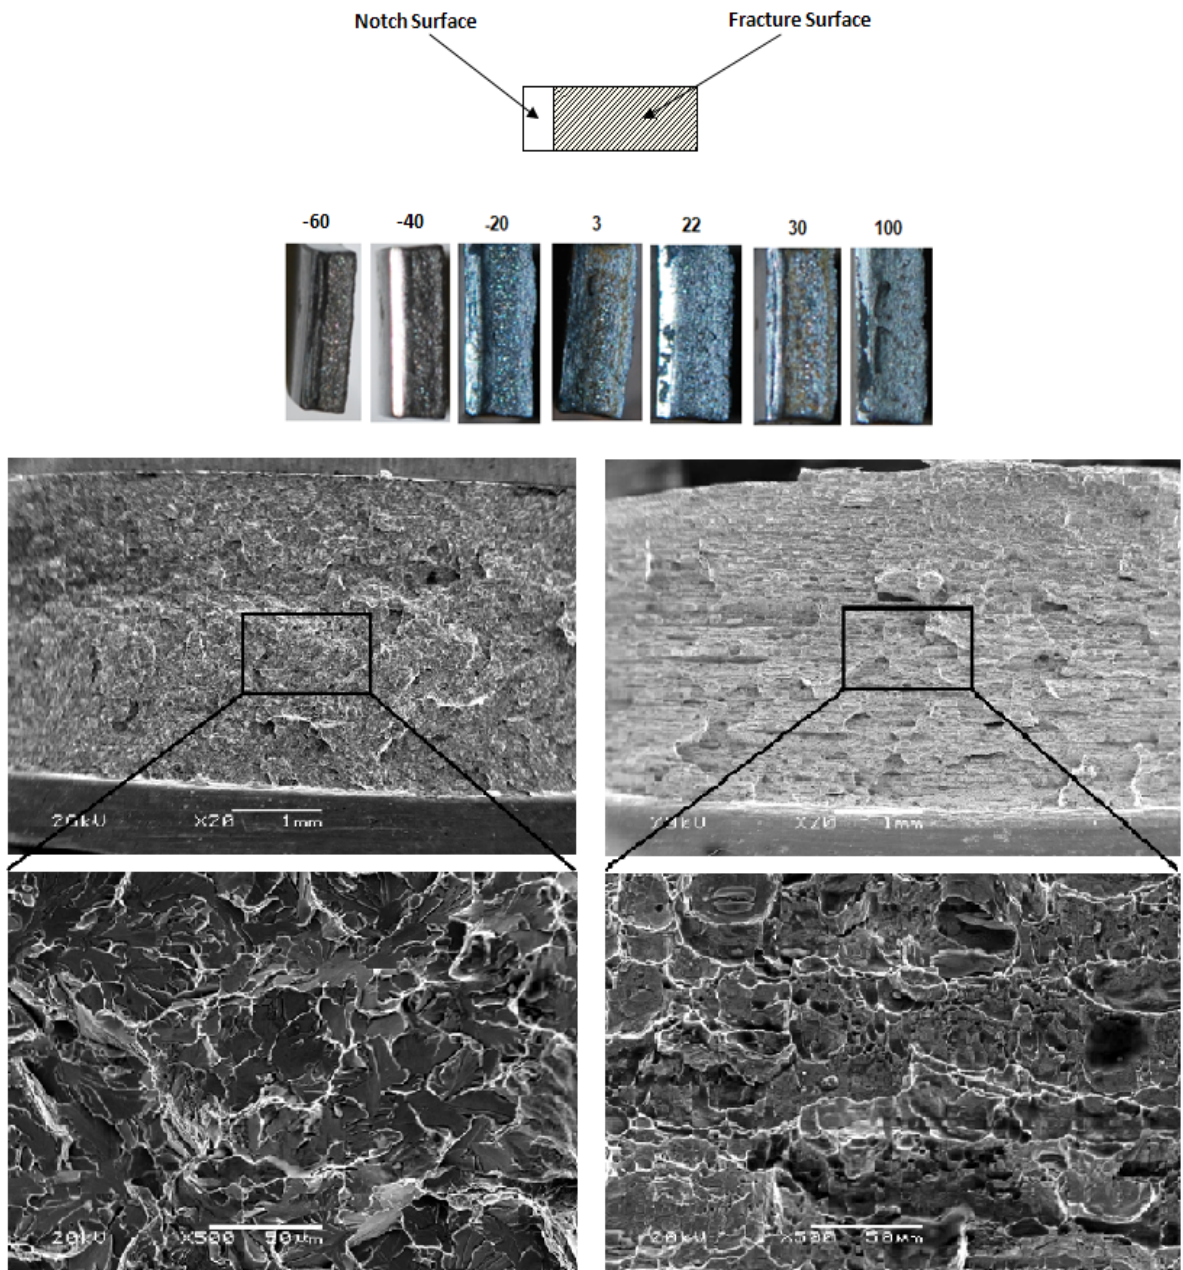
10- Fracture Surface of Specimens at Different Temperatures (°C)
